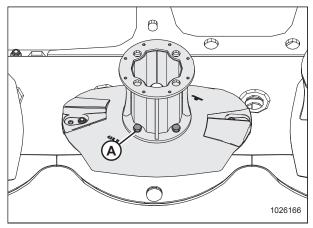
New Clockwise Drum Assembly Positioned on Spindle
